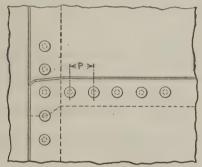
EXAMPLE OF LAP JOINT, LONGITUDINAL OR CIRCUMFERENTIAL, SINGLE-RIVETED
